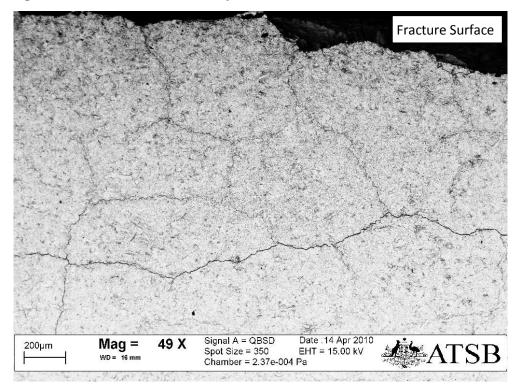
Steel surface cracks adjacent to fracture surface
